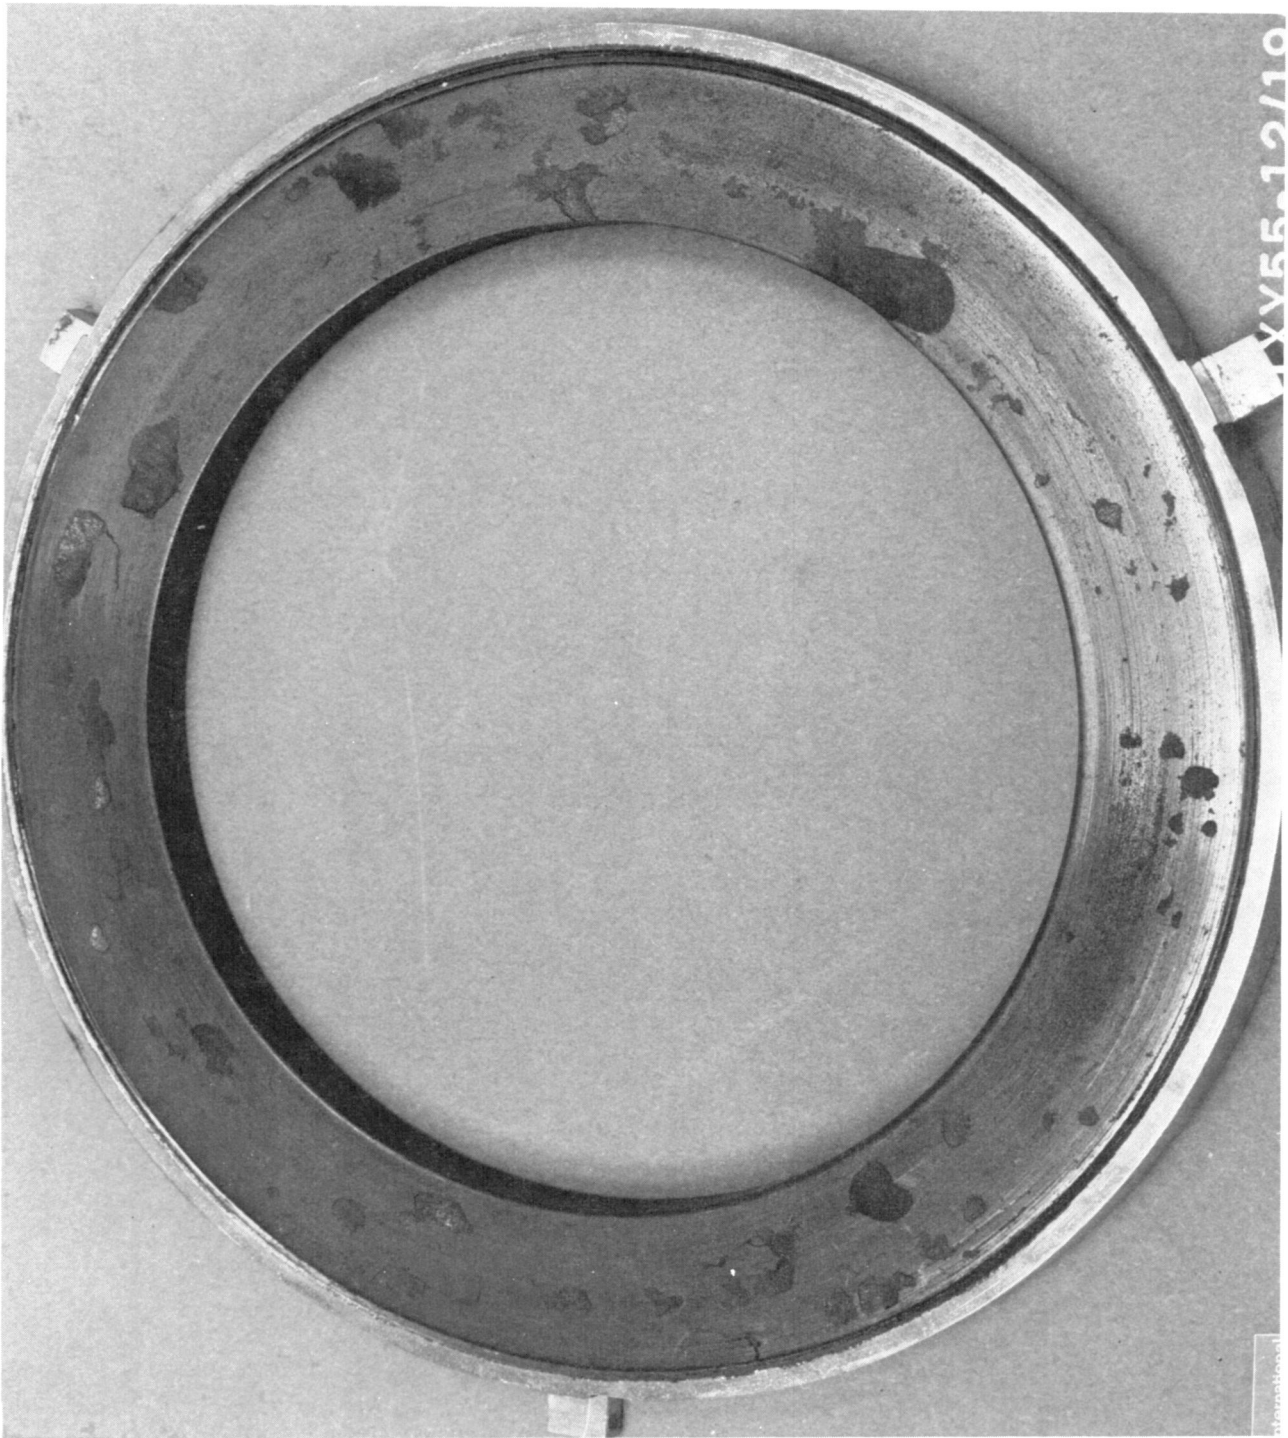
Spiral Groove LOX Seal Carbon Seal Ring SSCY 6563-1, S/N 01, Posttest 142, Build 4
